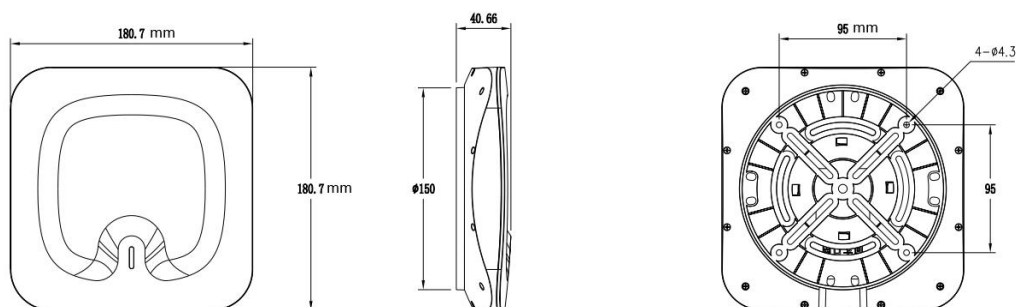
MKBAL-C25-P AoA Locator Mechanical Drawings
